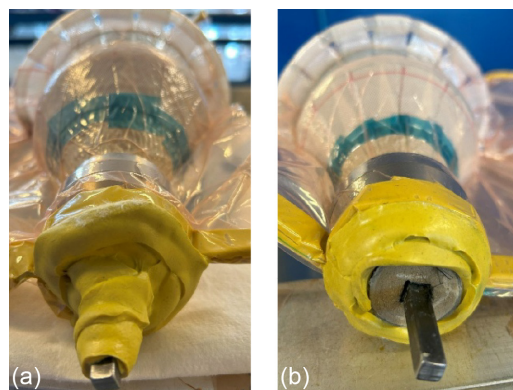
Tacky tape applied on ends of sand mandrel to maintain vacuum seal. (a) Smaller end. (b) Wider end.
